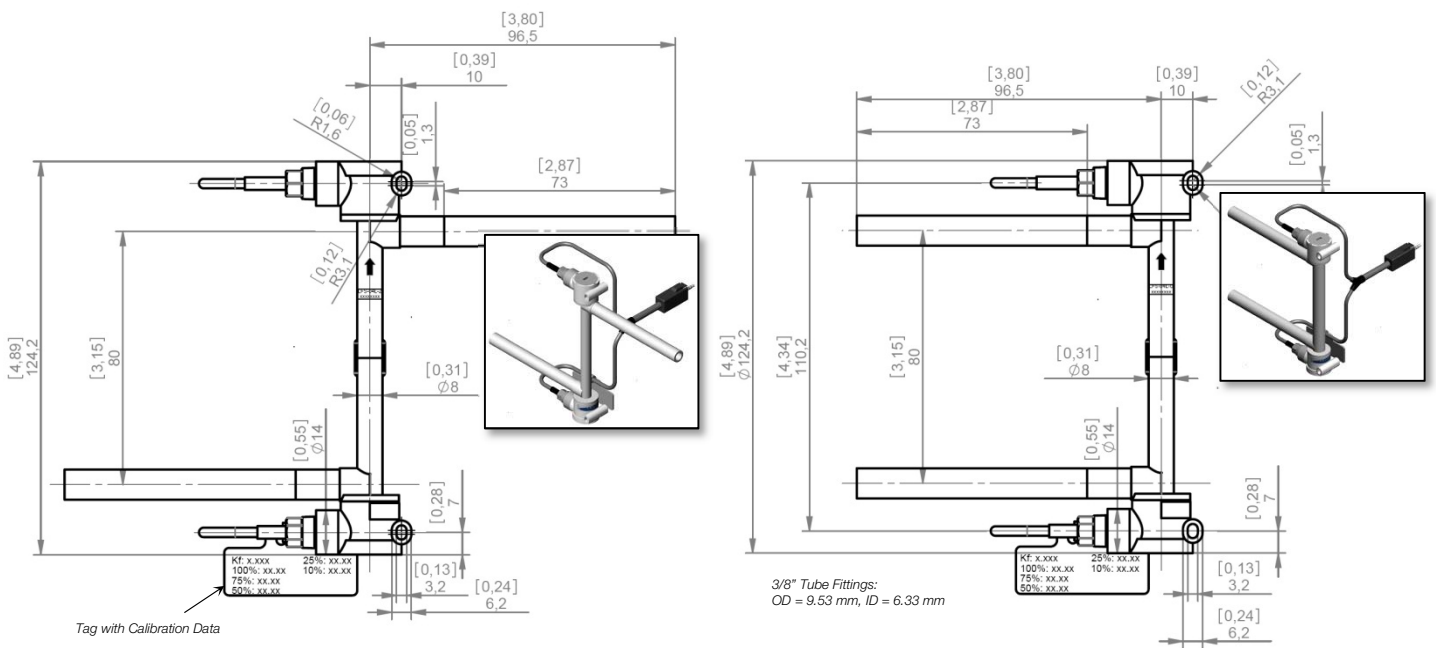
Dimensions of LFS-04L flow sensor (dimensions in [mm])
